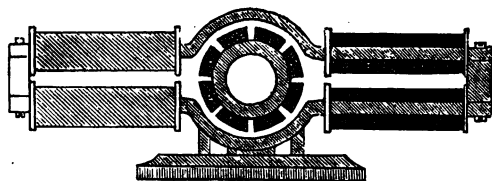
Siemens Horizontal Continuous Current Machine.
